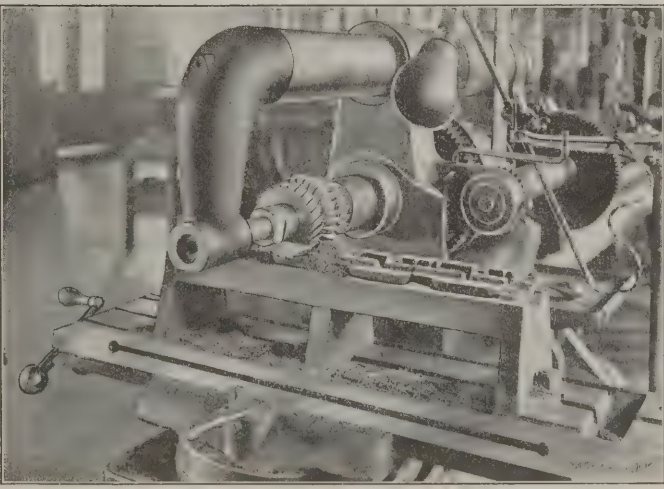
Using Gang of Cutters for Rapid Finishing by Milling.
